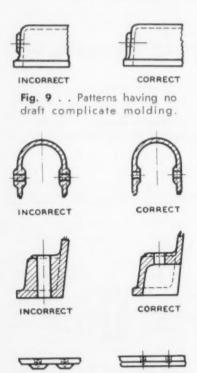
Outside boss (top) should be eliminated to give pattern draft. Center design often saves machining, metal. Continuous rib design shown at bottom, rather than bosses permits shifting of holes.
